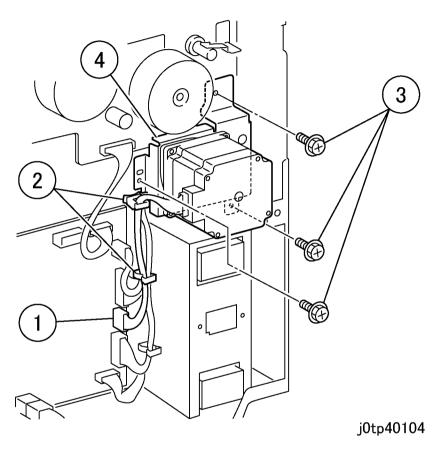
Removing the Takeaway Motor Unit (j0tp40104)
